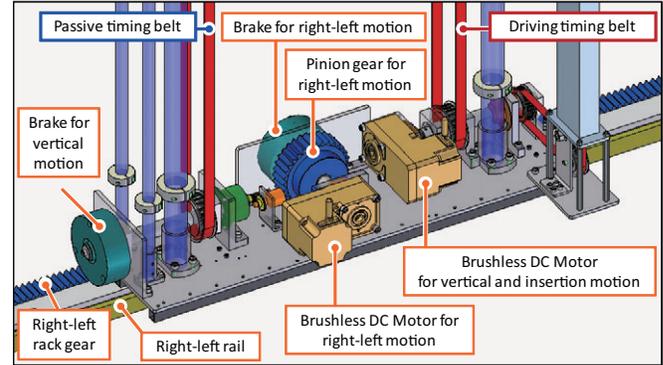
Brushless DC motors and rack-and-pinion at the bottom plate.
